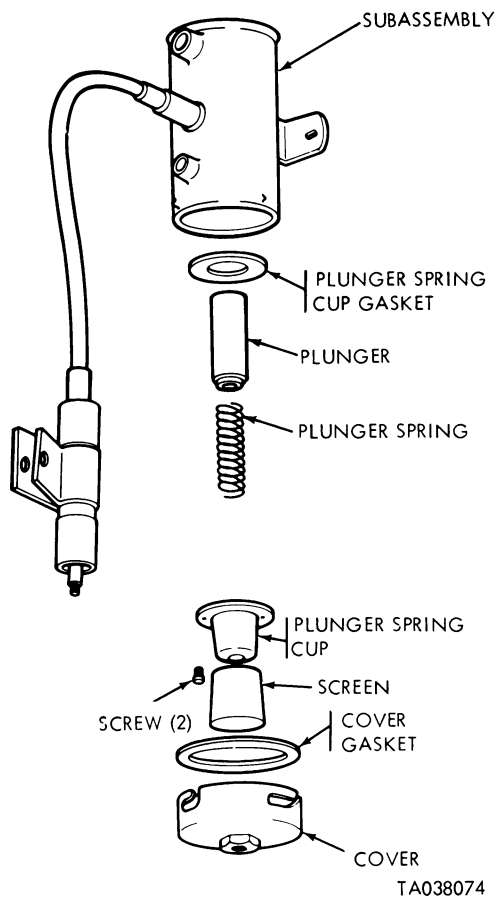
Personnel heater fuel pump disassembly and assembly.
